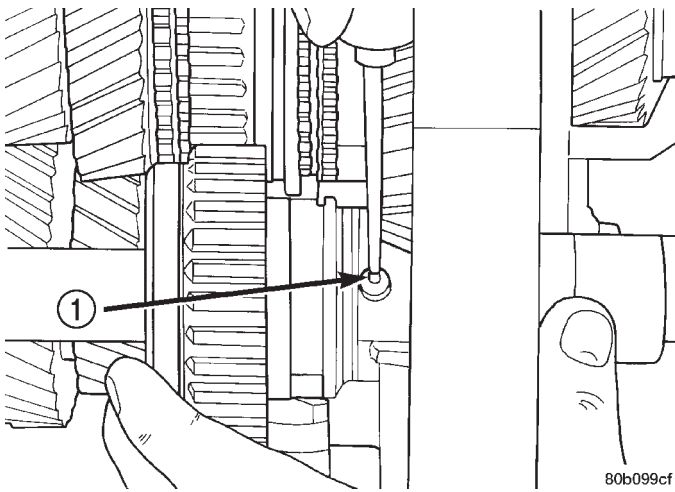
Install Fifth Gear Thrust Ring Lock Ball
